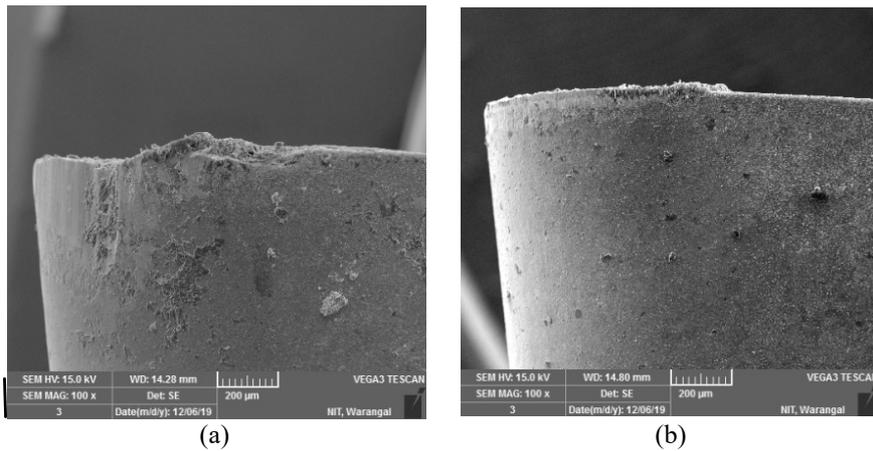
Flank wear with (a) dry machining and (b) SO0.3 machining at 112 m/min.
